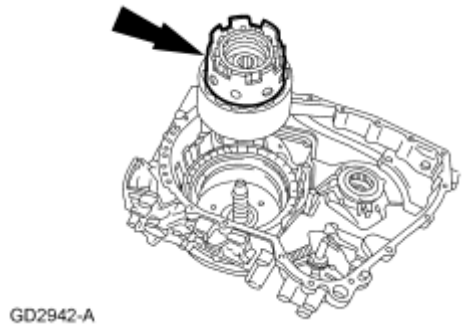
Forward/Coast/Direct Clutch Cylinder Assembly & Reverse Clutch Drum Assembly
